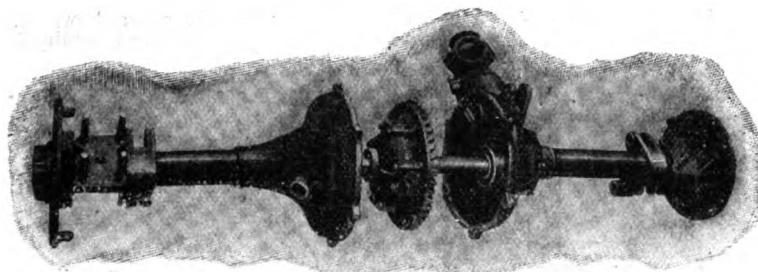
The Back Axle of the Cadogan 16-20-h.p. Car.
